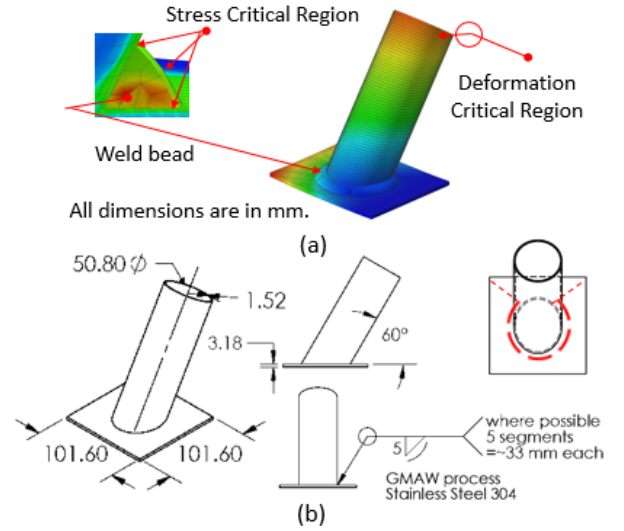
Plate-tube skewed T-joint used for the experiment. (a) Plate-tube skewed T-joint in Simufact welding software. (b) Engineering drawing of the Plate-tube skewed T-joint
